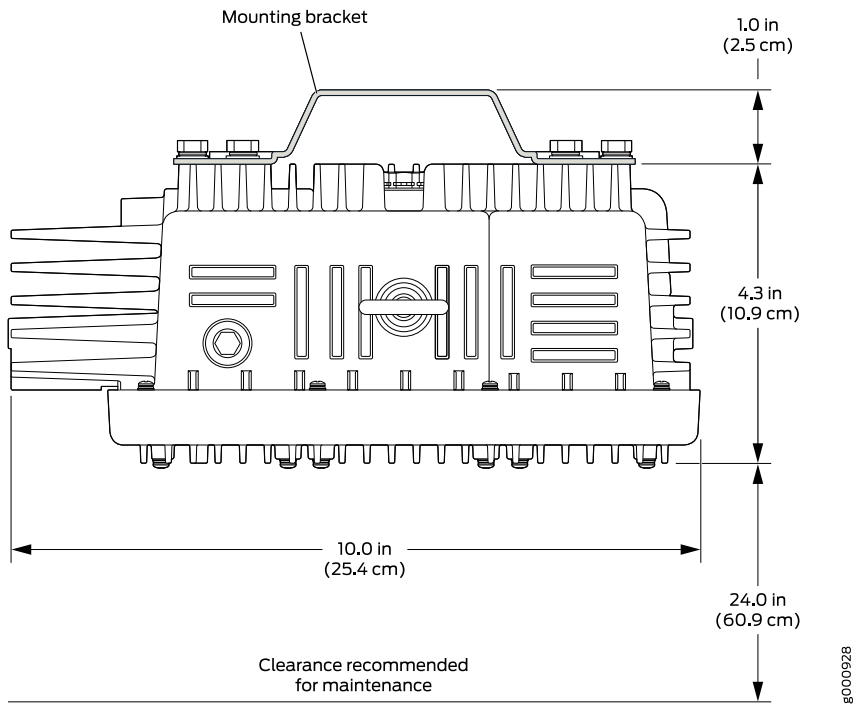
ACX500 Outdoor Chassis Dimensions and Clearance Requirements—Top View
